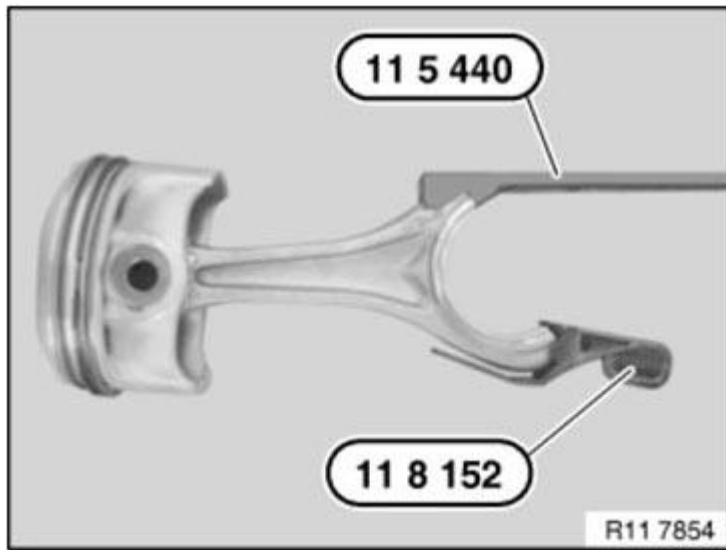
Inserting Special Tools 11 8 151 And 11 8 152 Into Conrod
